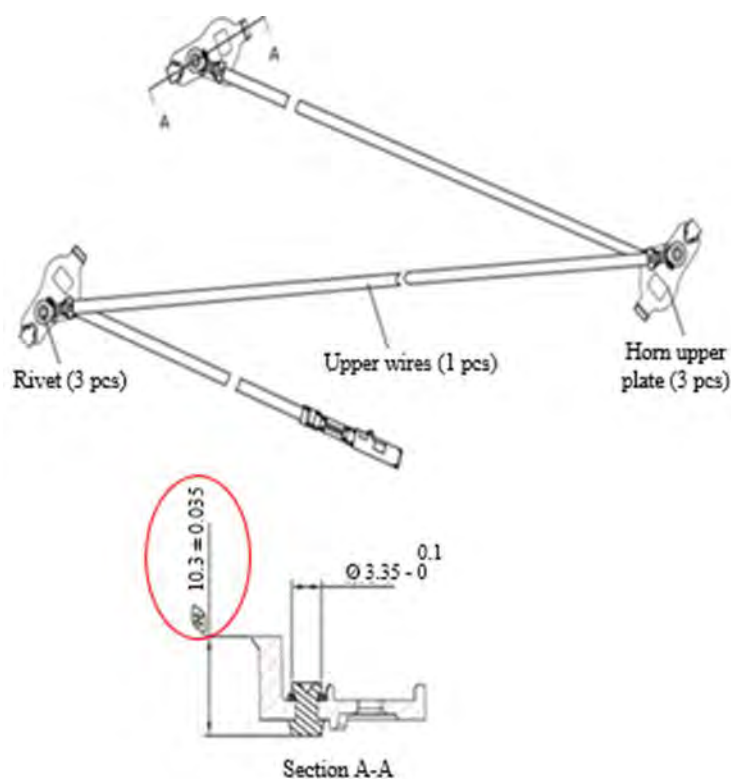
Assembled Rivet on Upper Wire Horn Assembly
